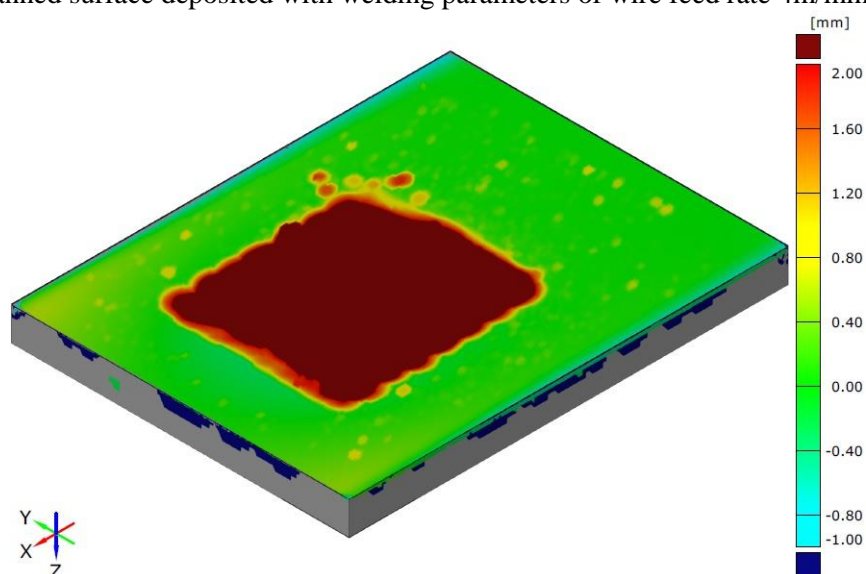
Scanned surface deposited with welding parameters of wire feed rate 4m/min and 21V
